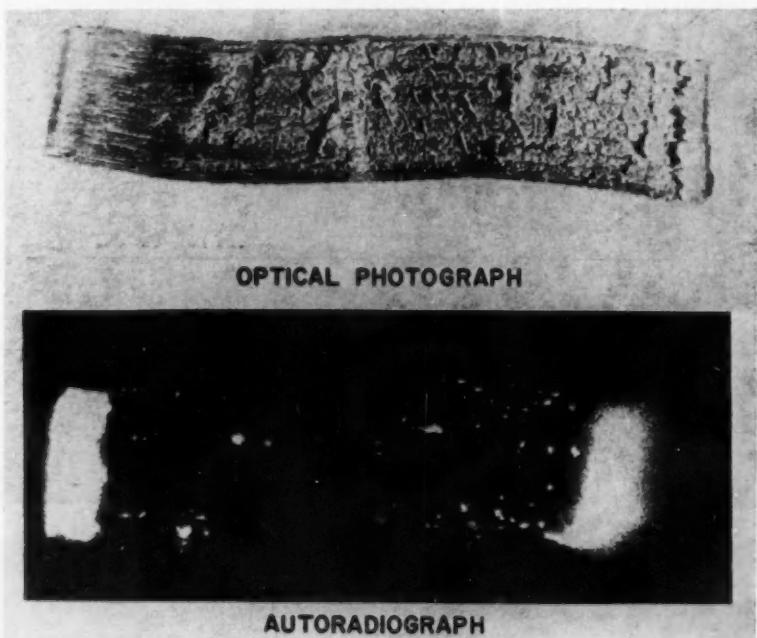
Optical photograph and autoradiograph of the face side of a milling chip. Note the high concentration of wear particles at the left caused by impact of the tool entering the workpiece. The high concentration at the right results from the presence of the built-up edge on the tool.
